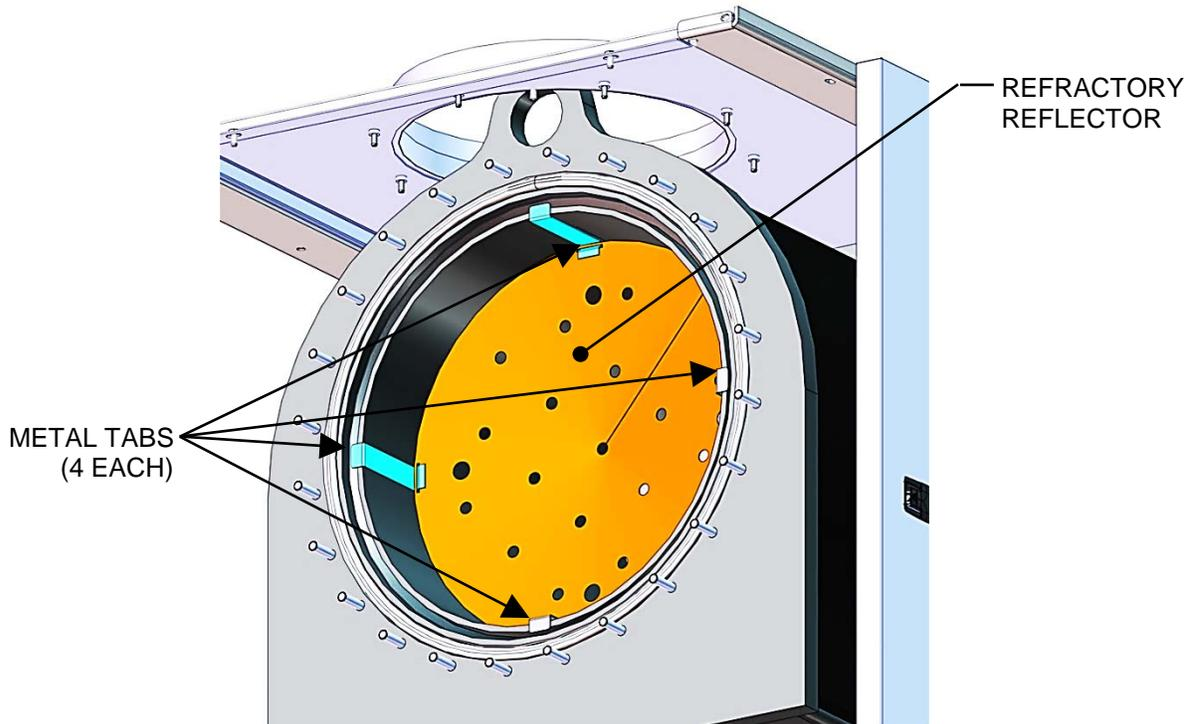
Partial Rear View – Rear Plate and Refractory Removed
